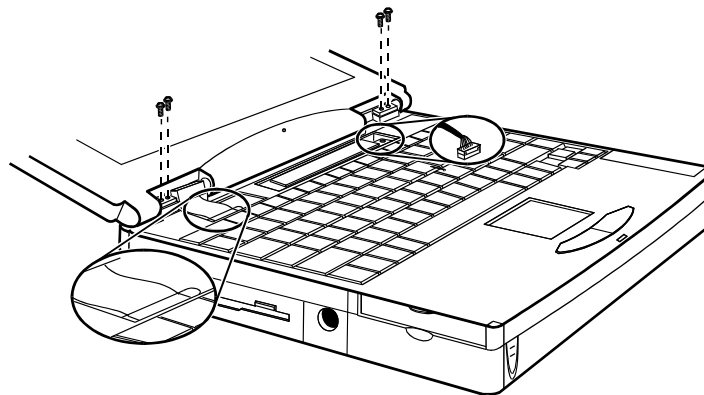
REMOVING SCREWS FROM THE HINGES AND UNPLUGGING CONNECTORS
